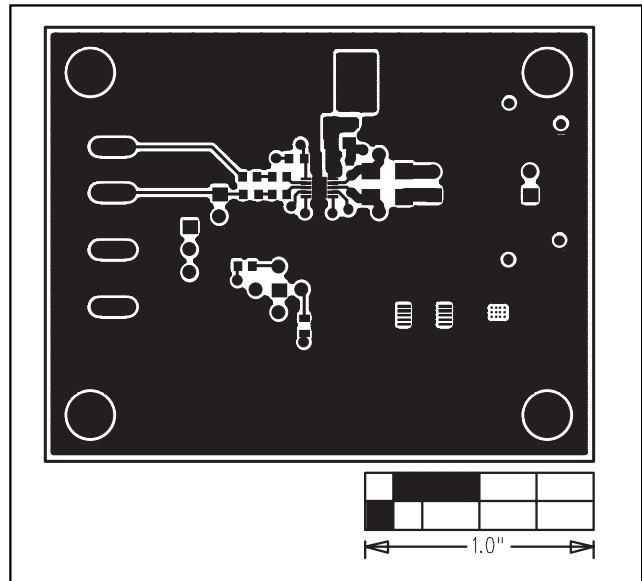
MAX9700B EV Kit PC Board Layout—Component Side
